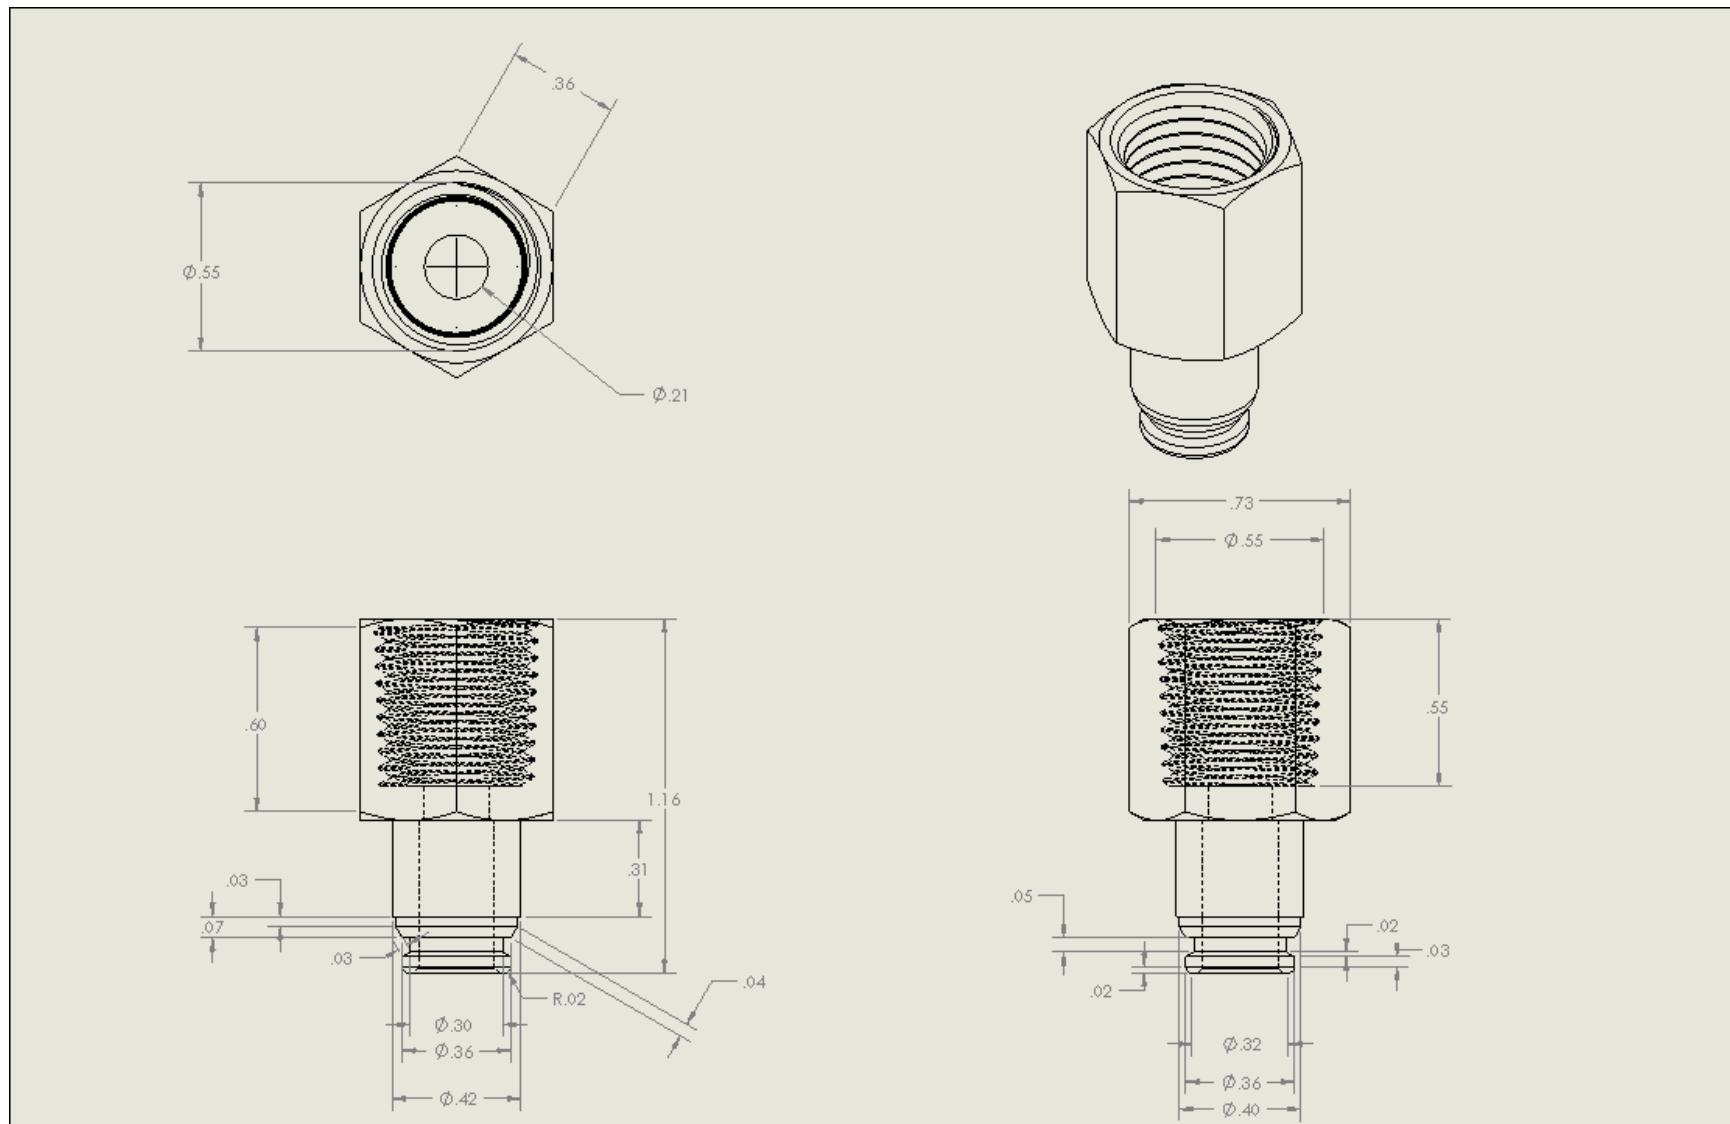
Part 1021 (Push-to-Connect Tube Fitting for Air) Part Drawing
